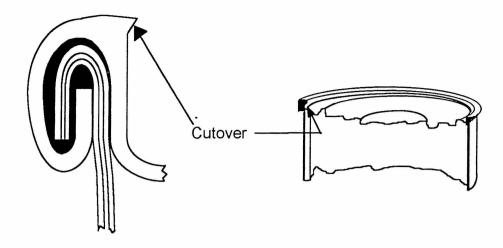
Seam cross-section at the crossover (lap), soldered cans.
